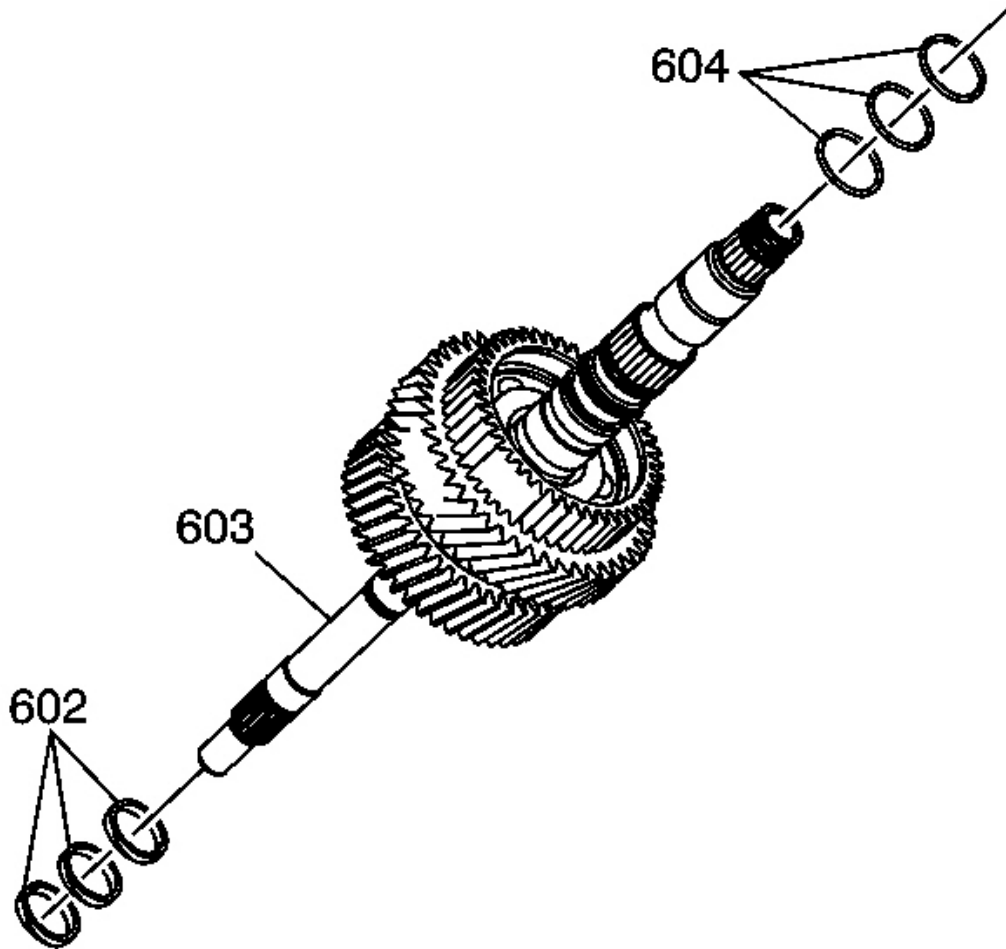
Installing Square Cut Mainshaft Fluid Passage Seals & 4th/5th/Reverse Clutch Housing Fluid Passage O-Ring Seals
